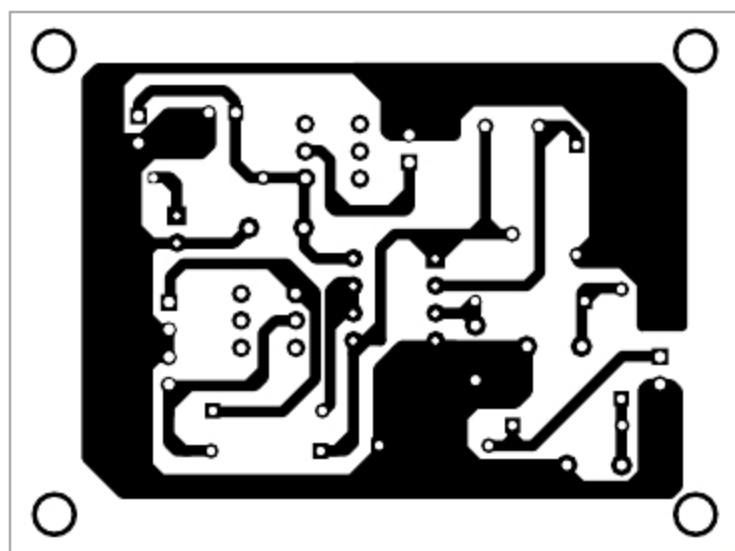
Actual-size PCB layout of PWM-to-analogue signal converter
